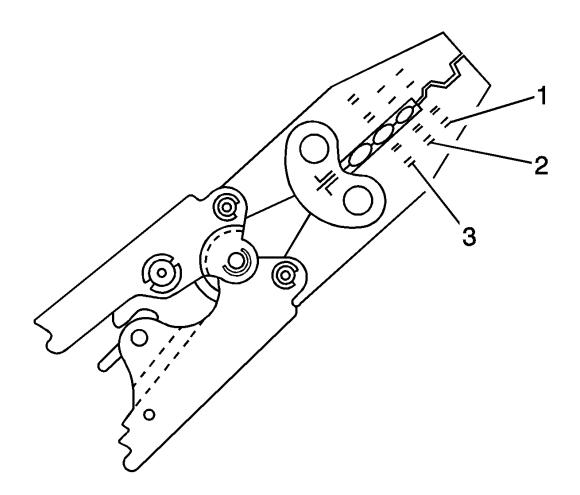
Identifying Splice Crimp Tool Nests Terminal Identification Courtesy of GENERAL MOTORS COMPANY
